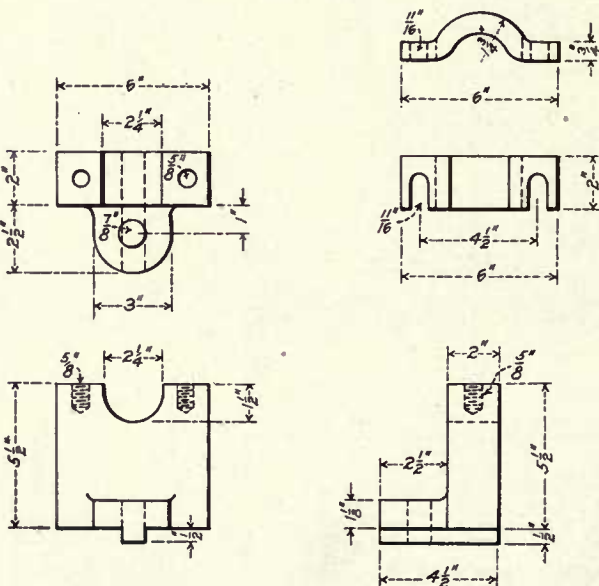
Blocks for Centering and Clamping Truck Wheel Centers on a Boring Mill.
